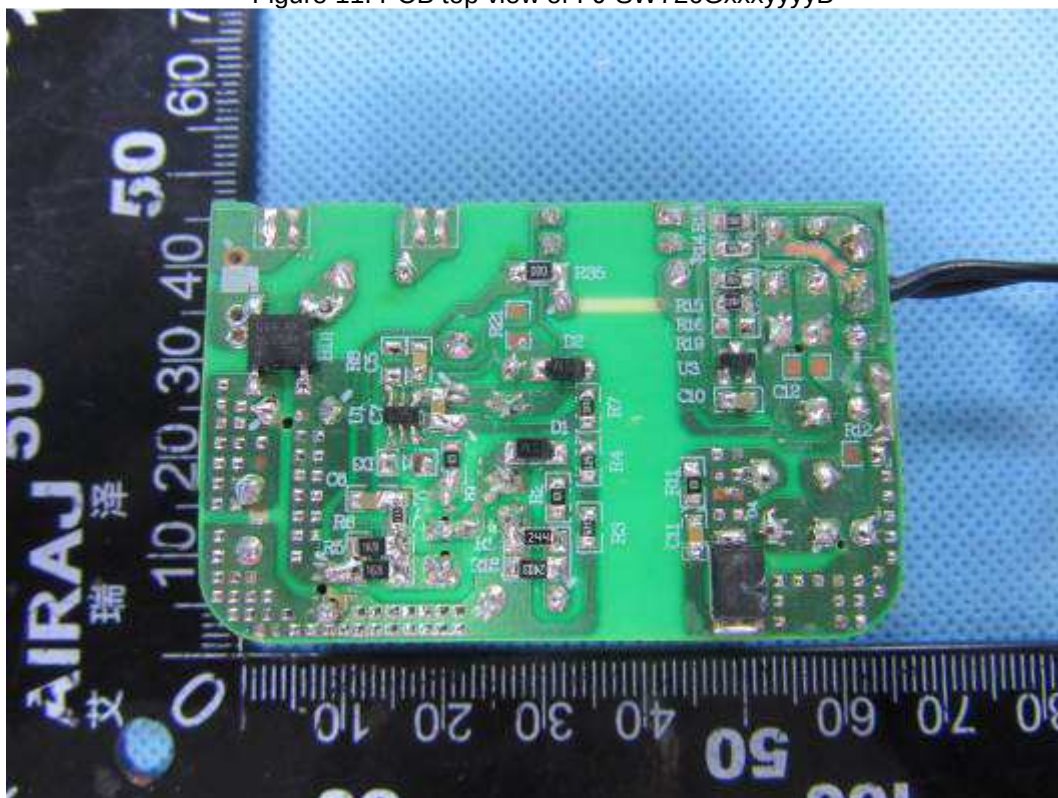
PCB Bottom view of FJ-SW726GxxxxyyyB
